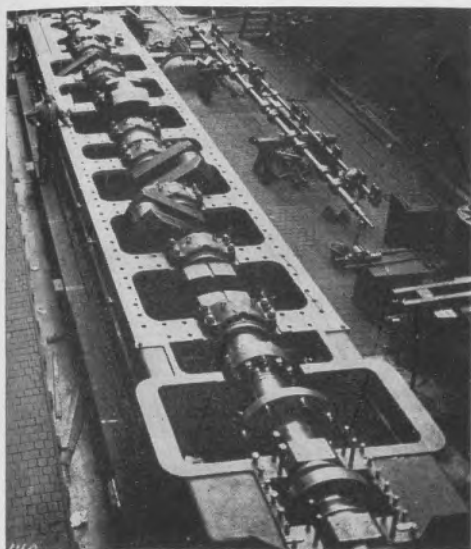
Bed plate of the Sulzer engine with shaft in position
